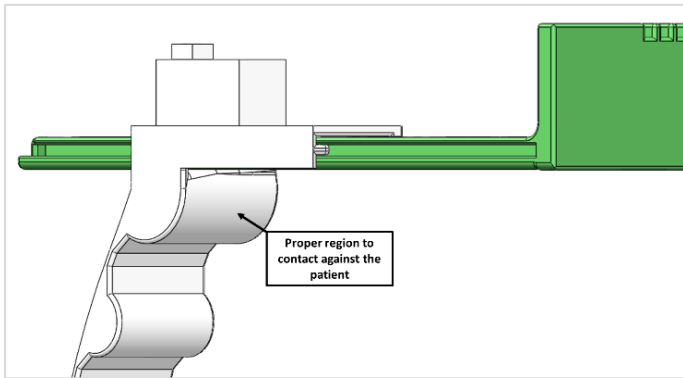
Final Prototype's Sliding Element assembled with a Shoulder Support
